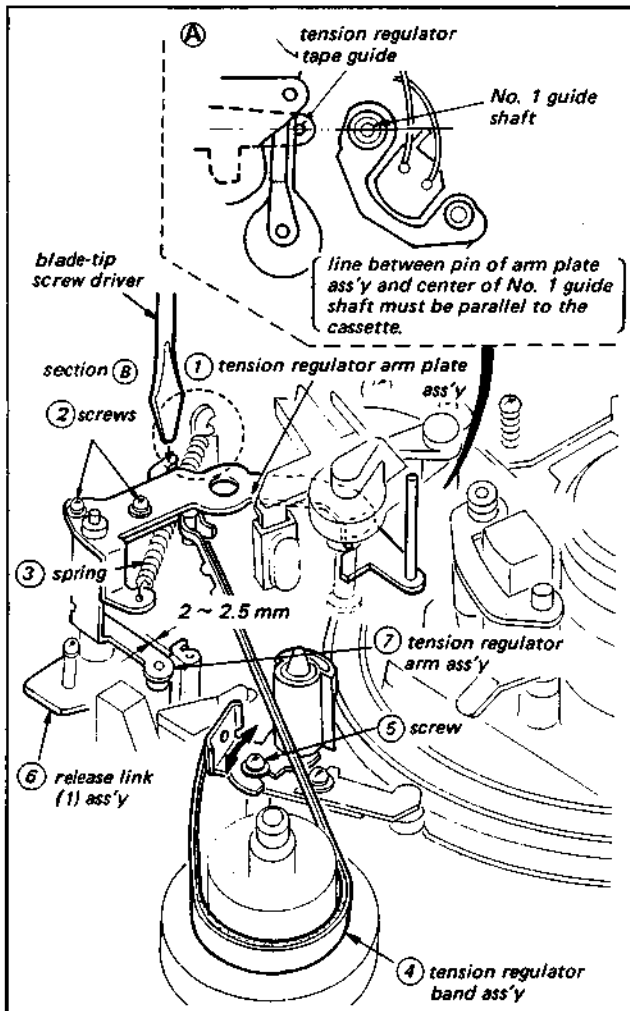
Replacement and adjustment (1) of tension regulator arm plate assembly
